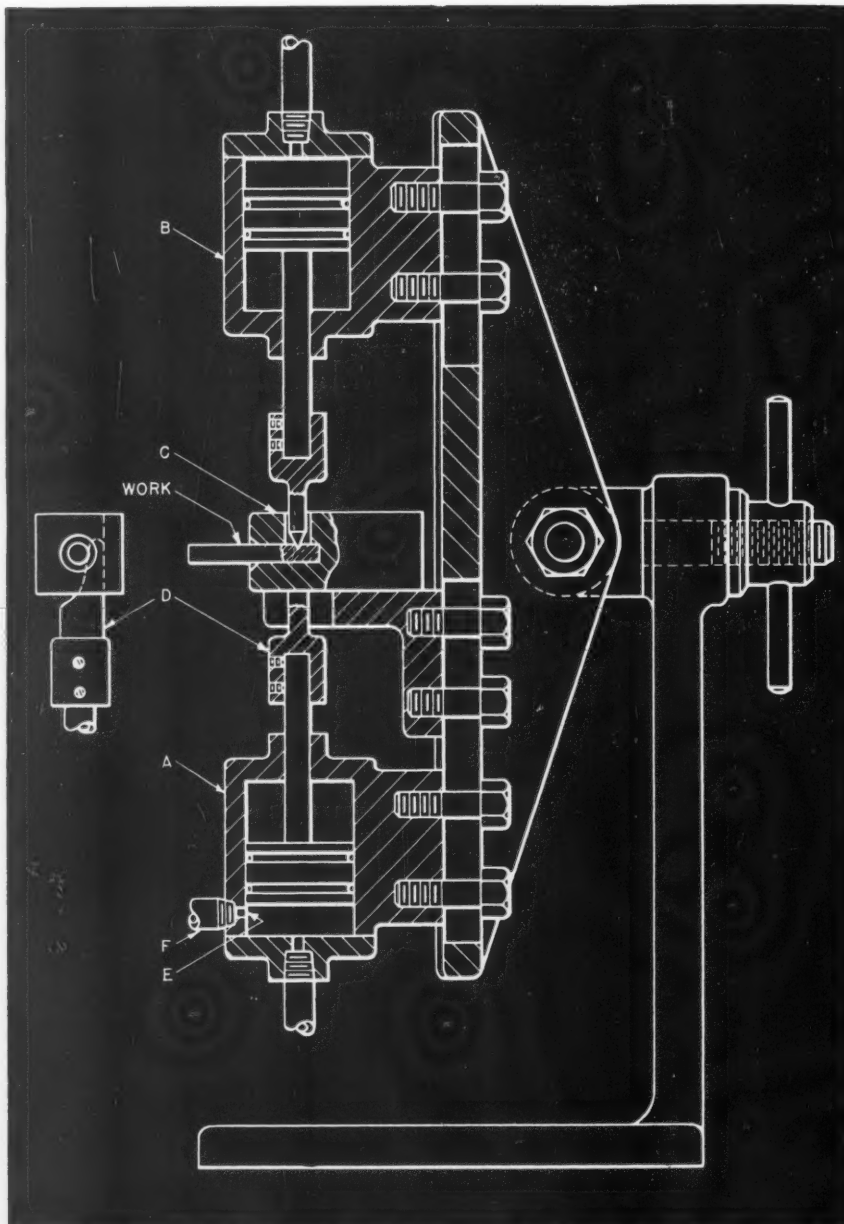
Bench type, air-operated fixture that eliminates special tools and the use of punch presses for staking, embossing, and prick-punching small parts
